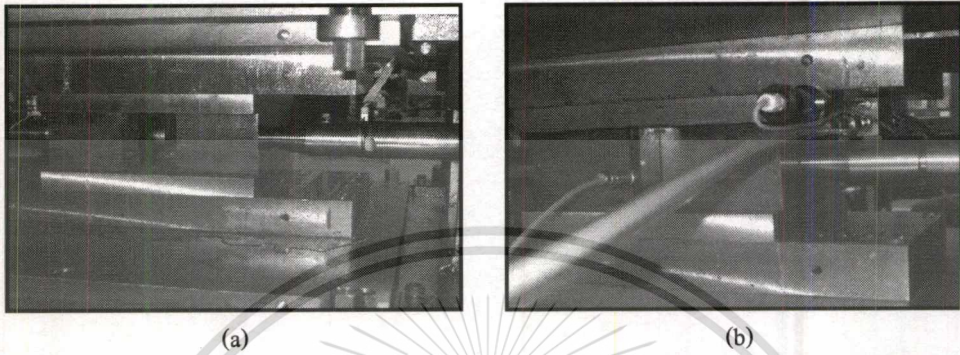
Hydroforming tools set on T.M.C 200 Ton press machine
